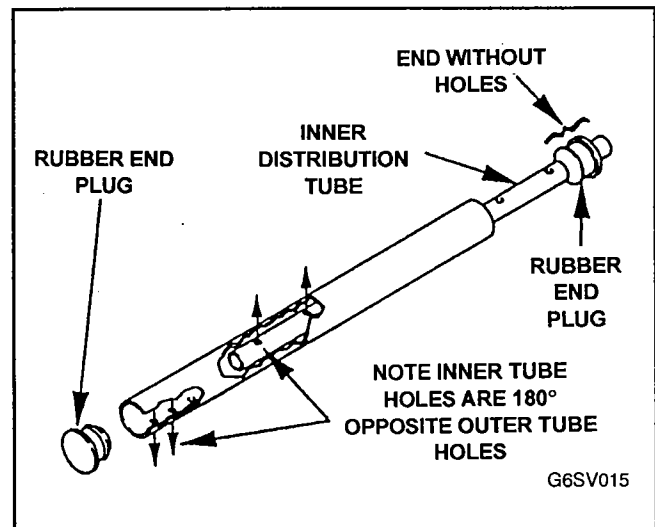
DISTRIBUTION TUBE DISASSEMBLY
